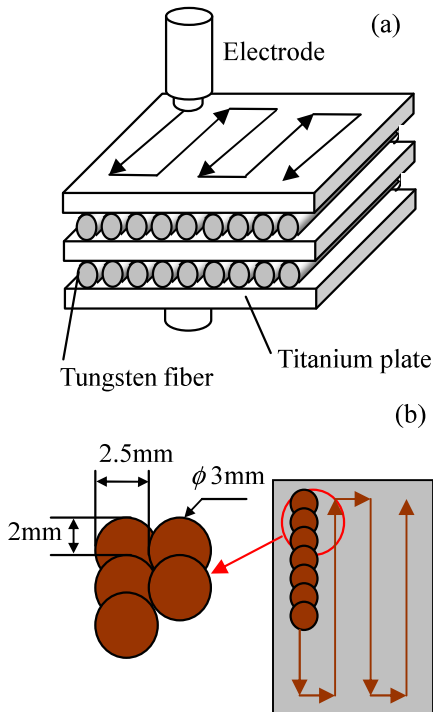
Schematic diagram of: (a) the manufacturing procedure by the spot welding method, (b) the spot welding positions which define the coverage for W/Ti composite.
